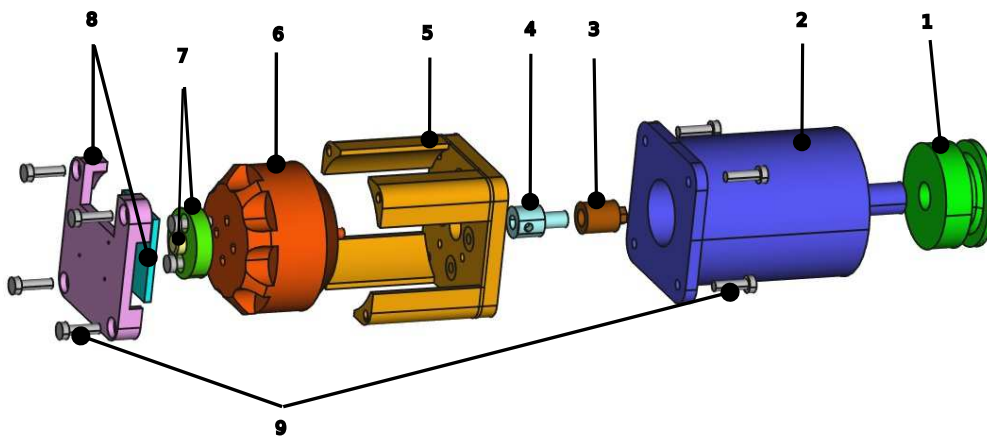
This figure shows a CAD assembly of a 3-phase BLDC actuation system. Key components include: 1- shaft head for tendon wrapping; 2- gearbox; 3- pin of a gearbox coupling ; 4- motor-to-gearbox cylinder pin; 5- aluminum based motor holder; 6- Gantt BLDC motor; 7- a magnet and a holder; 8- a magnetic encoder and its holder; and 9- M3 bolts.
